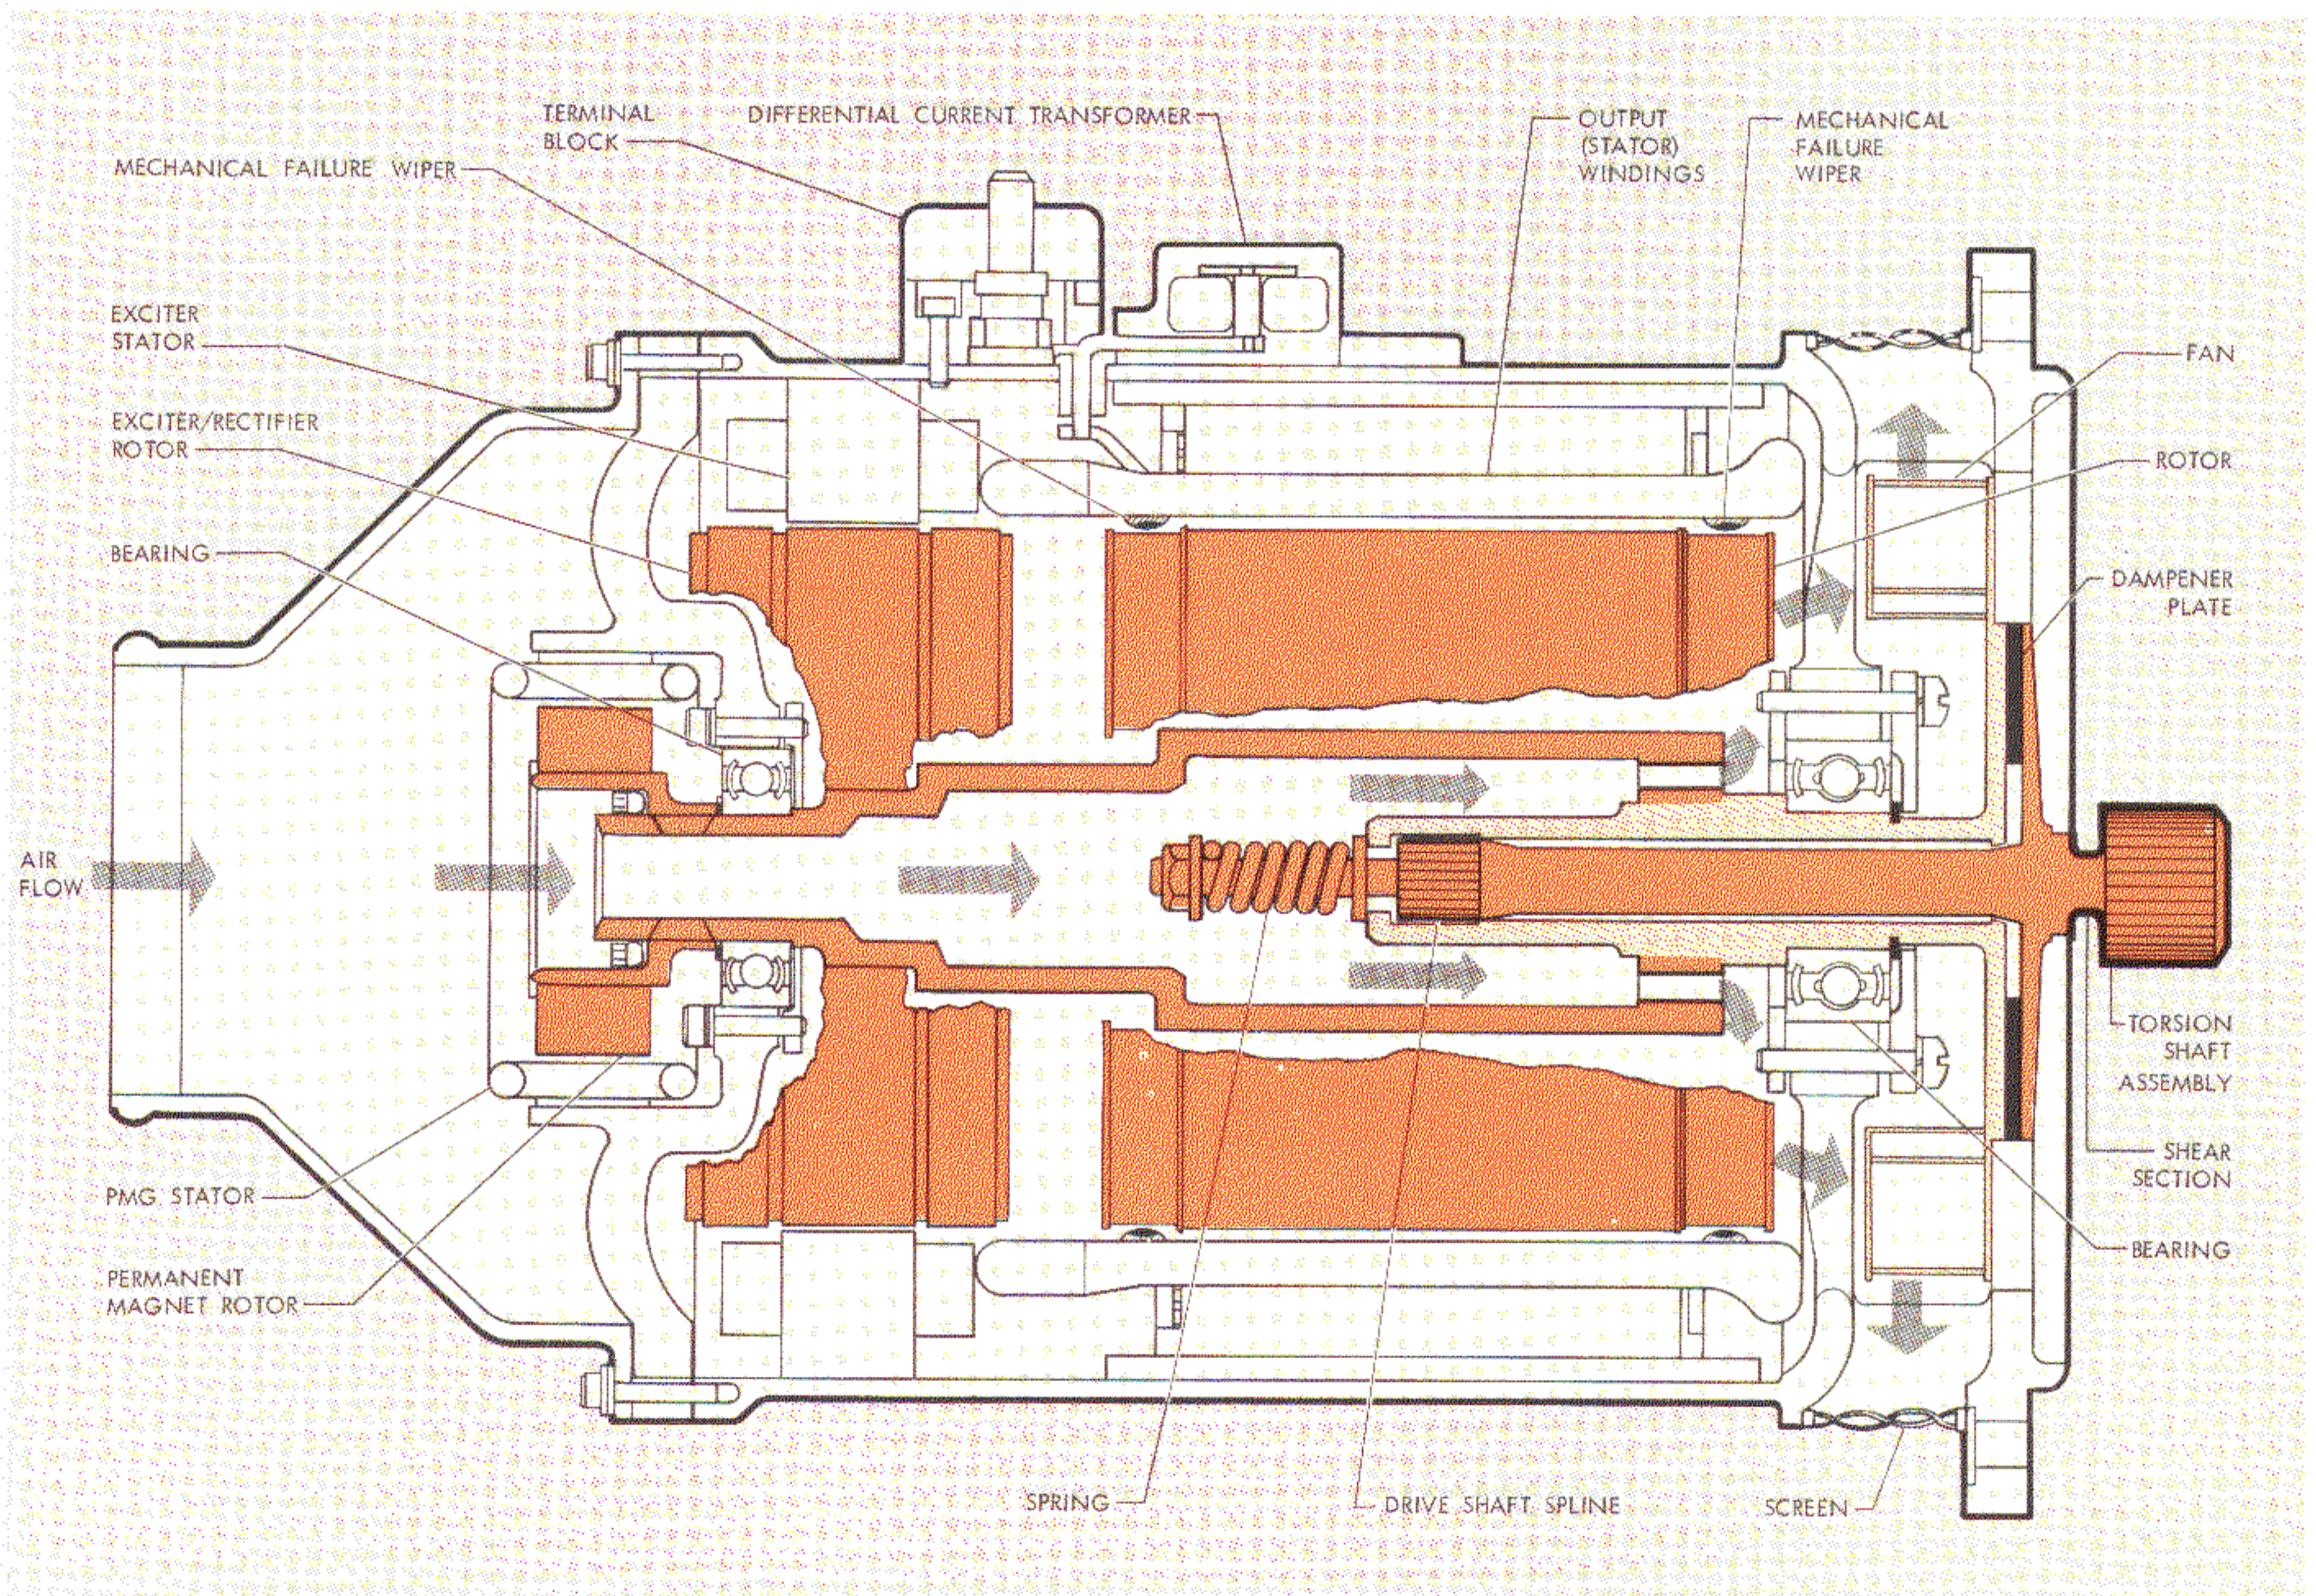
Generator Mechanical Construction with Details of Hollow Center Shaft
